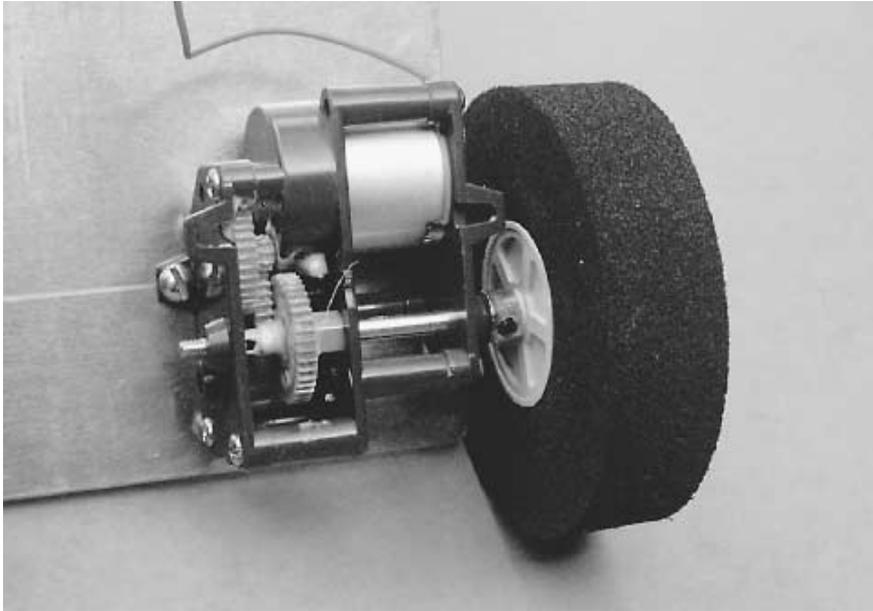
The gearboxes and motors are attached to the frame of the Buggybot using ordinary hardware.
